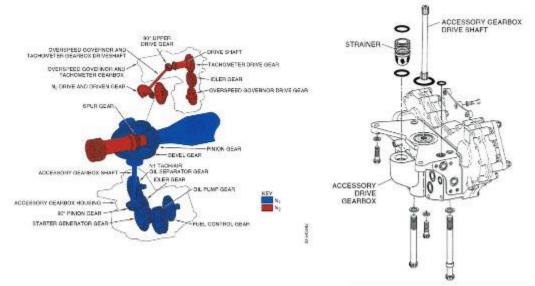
N1 ACCESSORY DRIVE GEARBOX; COURTESY OF OZARK AEROWORKS LLC
